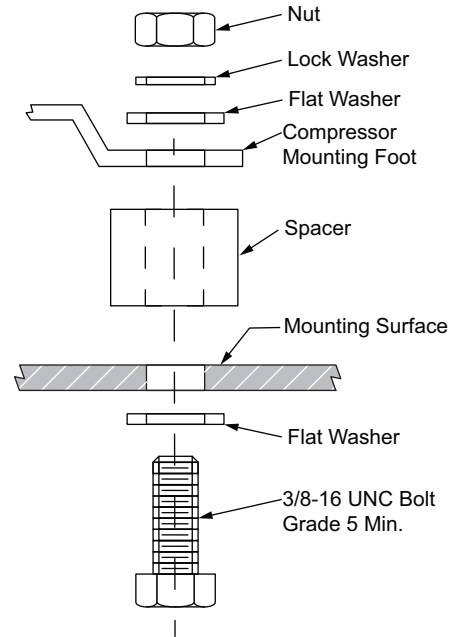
Rigid Mounting (Plate Foot with Spacer)
